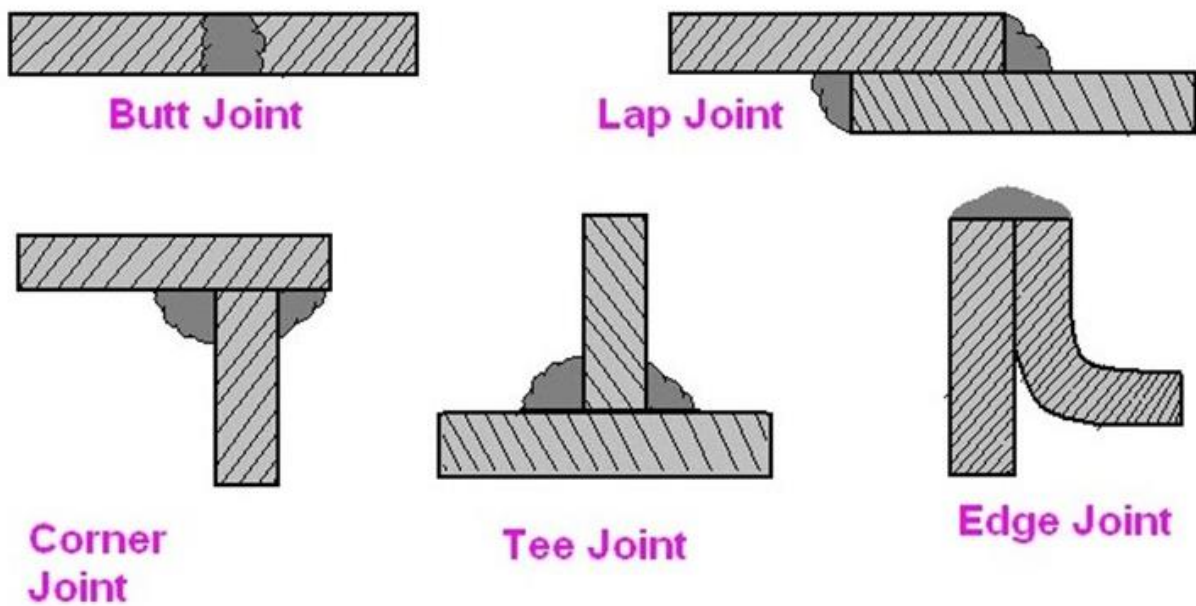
Types of Weld Joints (Hassan, 2010)
